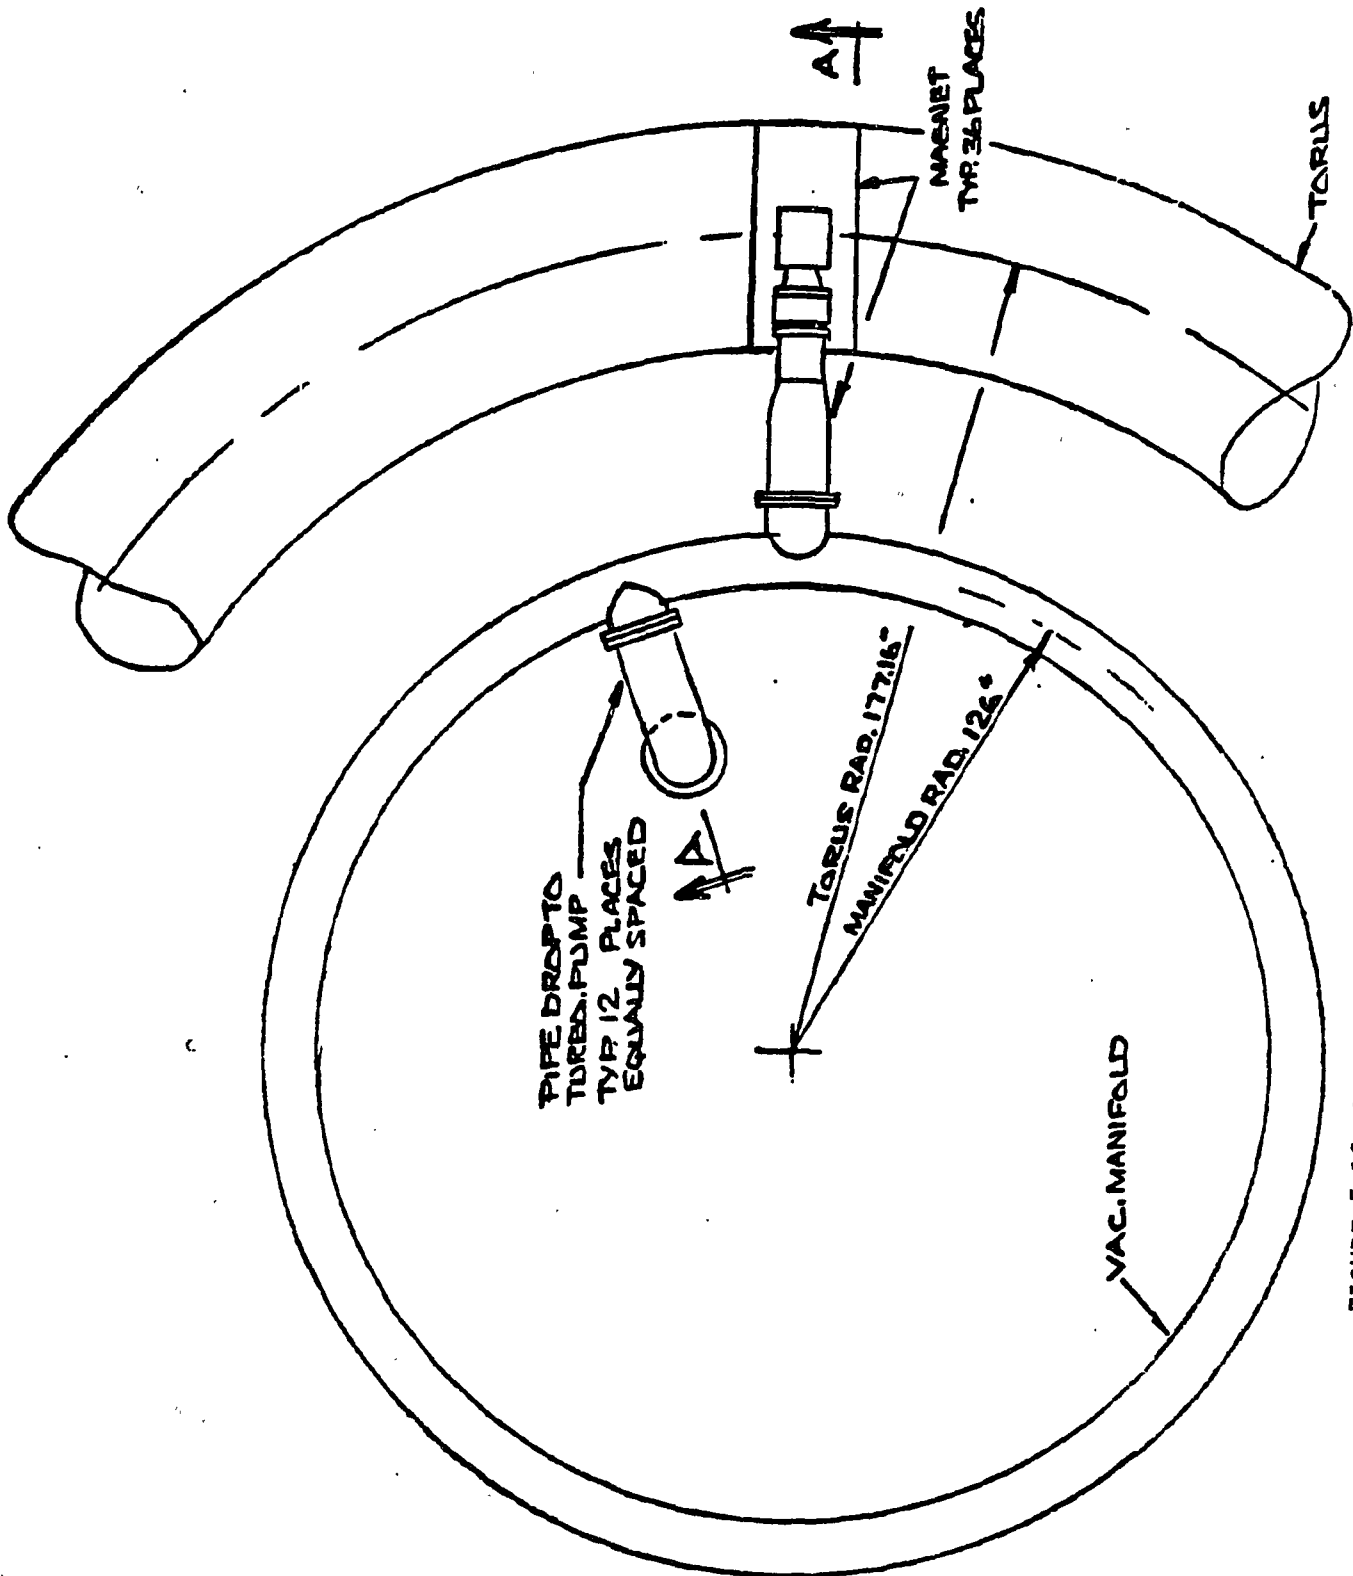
PLAN VIEW OF 10.48 INCH MANIFOLD SYSTEM
